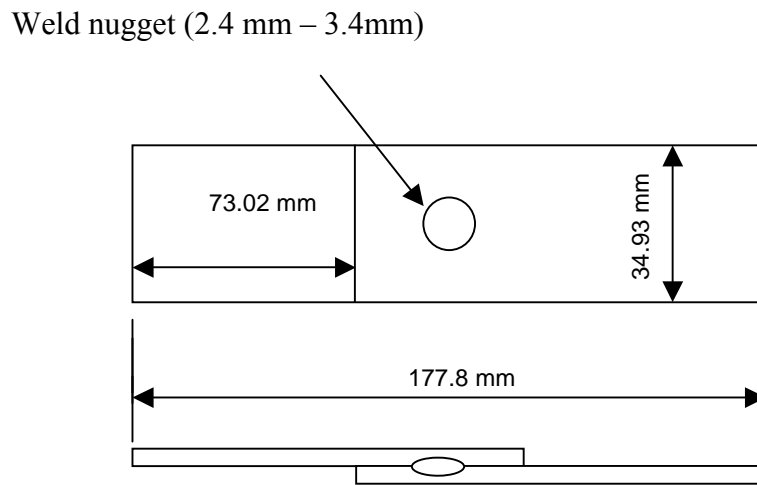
GEOMETRY OF RSW SPECIMENS.
